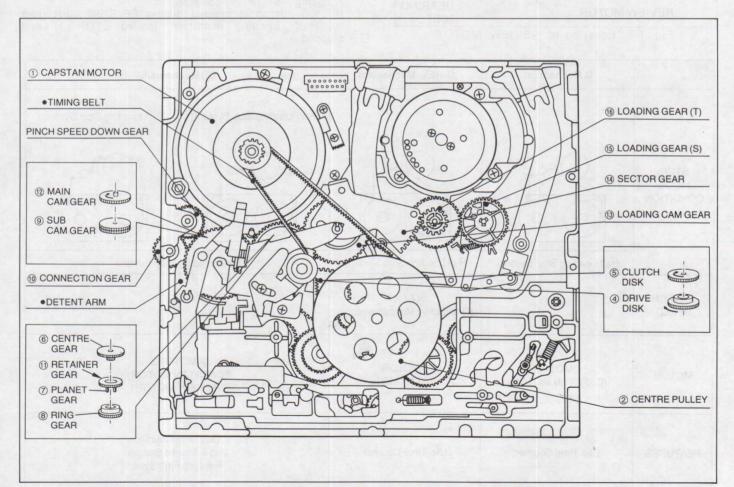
Bottom View of Mechanism (This figure is the G-REV. mechanism.)
